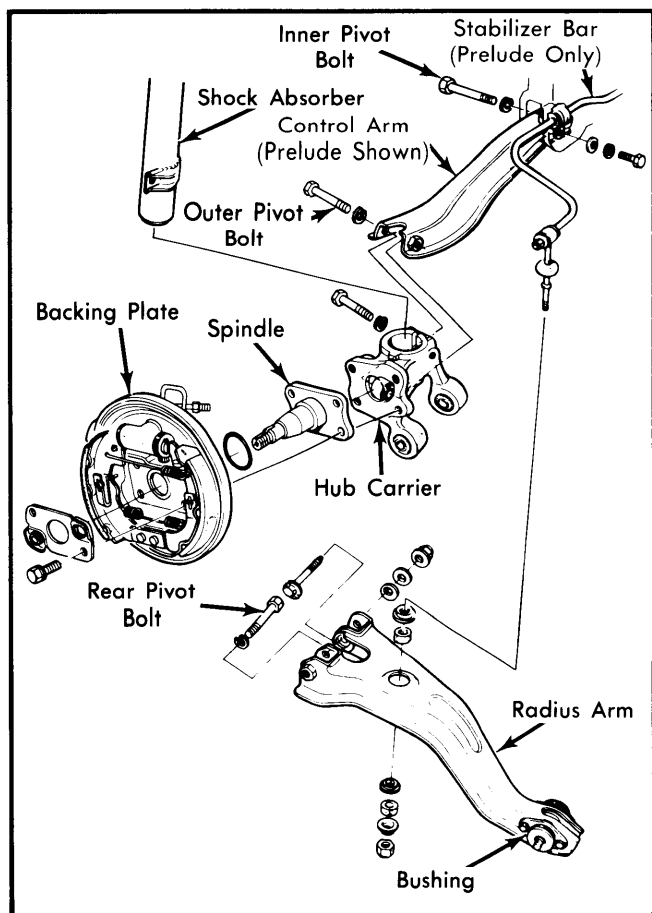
Exploded View of Civic and Prelude Rear Suspension
